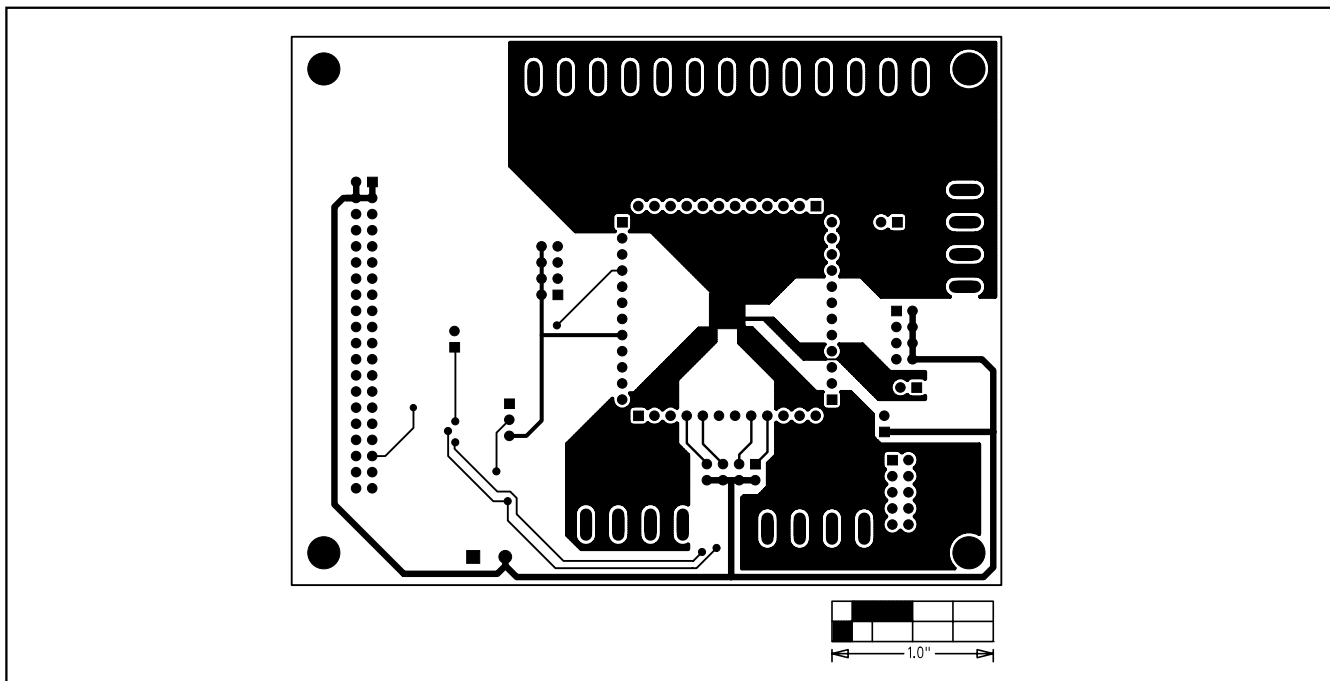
MAX1258 EV Kit PCB Layout—Solder Side
